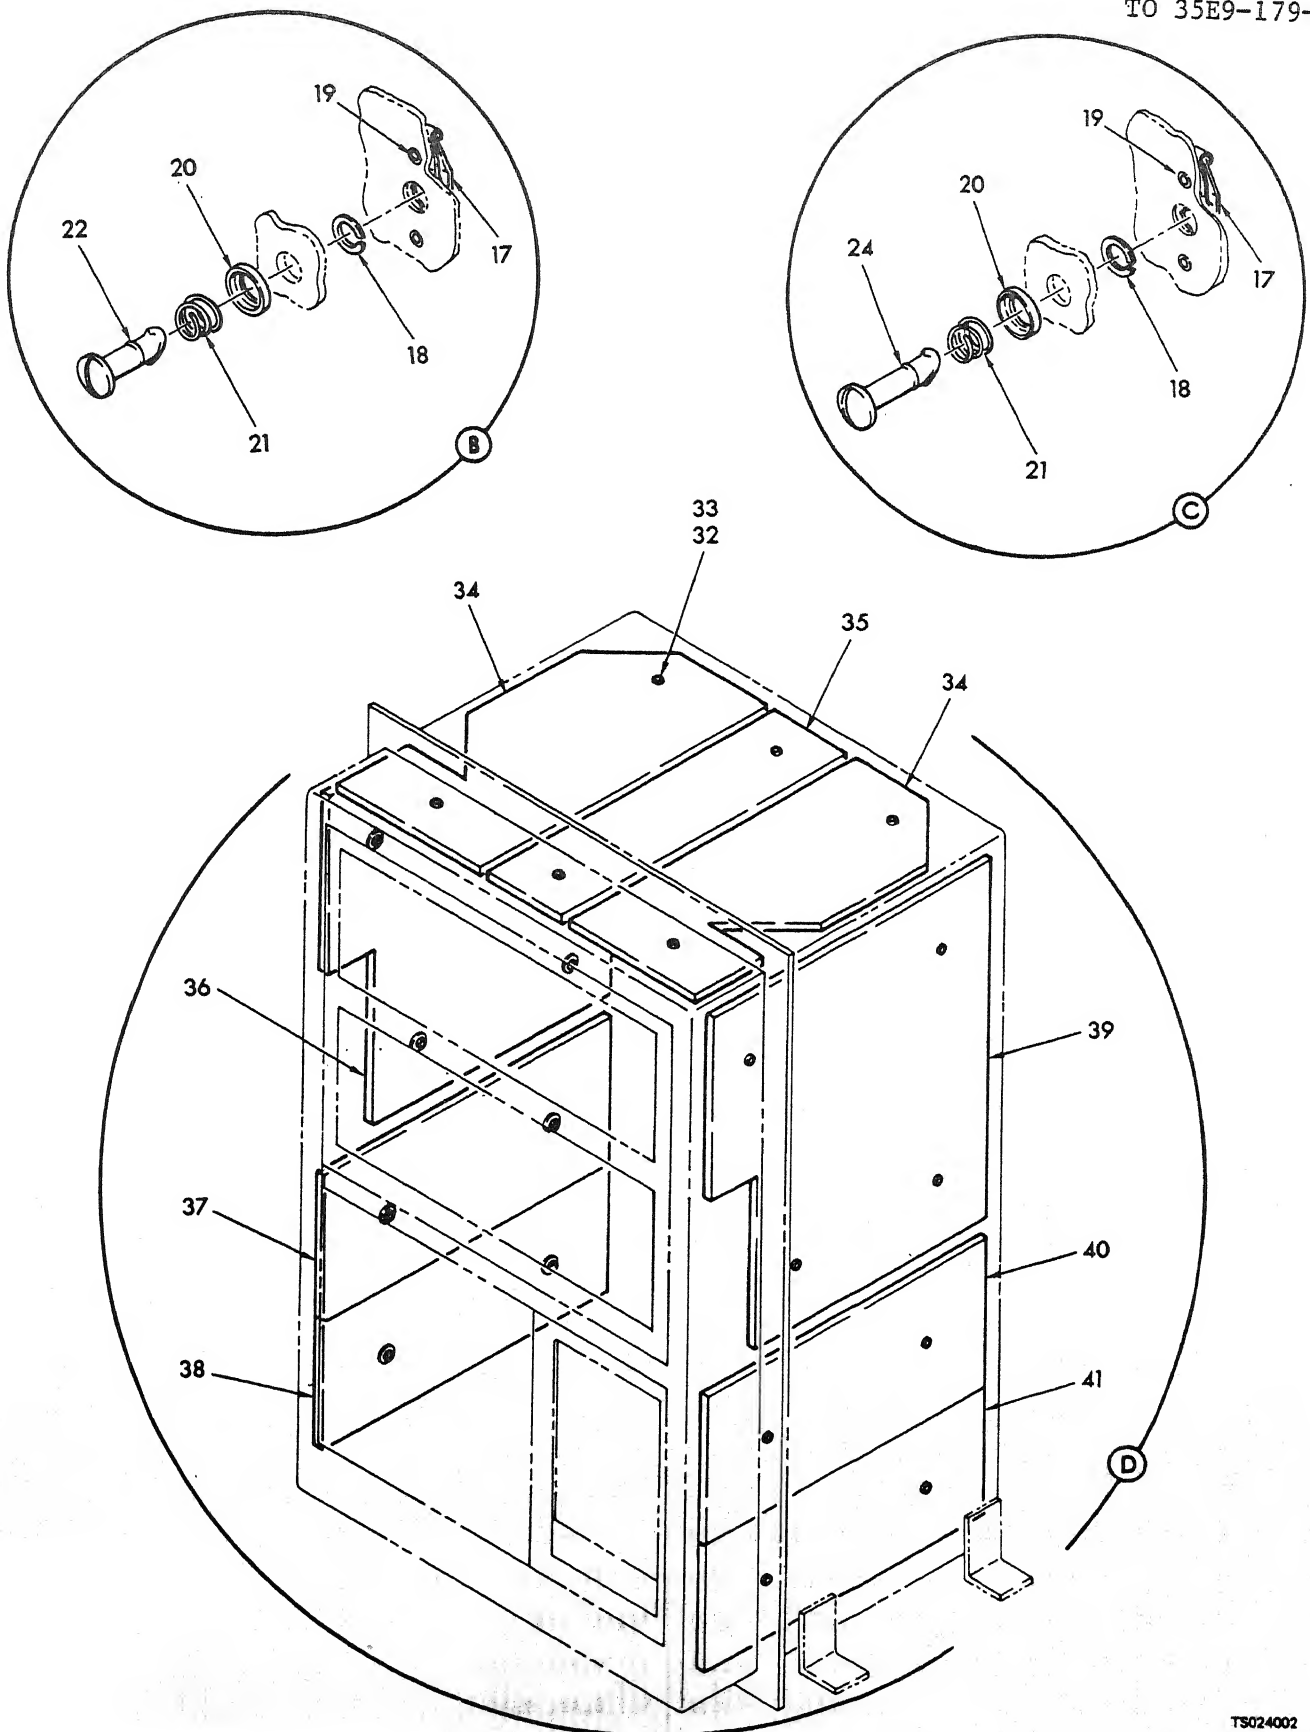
CHASSIS SECTION (SHEET 2 OF 2)
